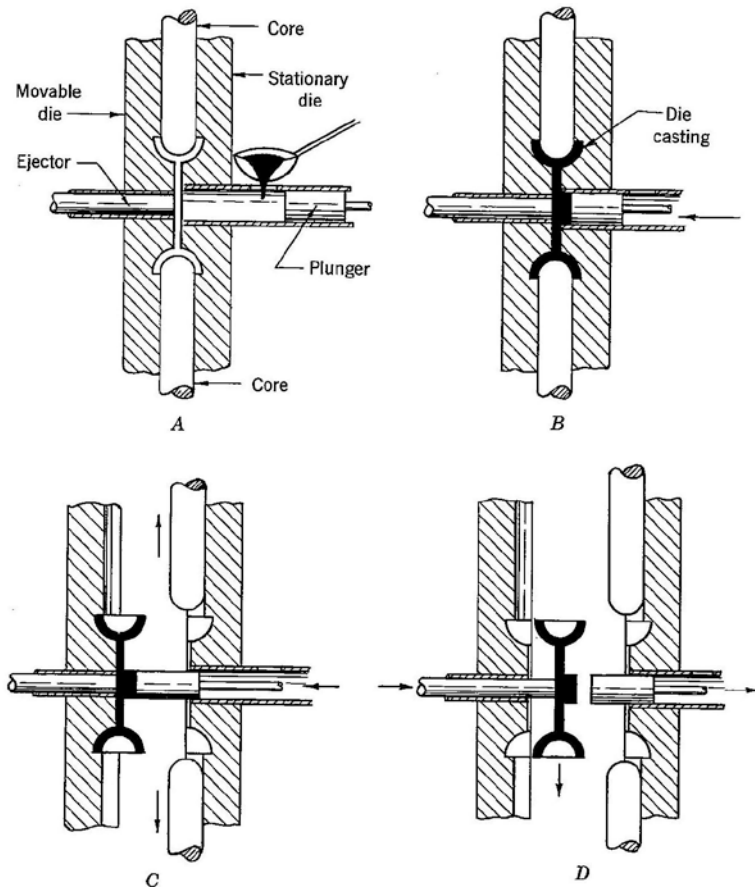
Another simplified diagram illustrating more of the principles of a diecasting machine, in this case a cold-chamber machine.
